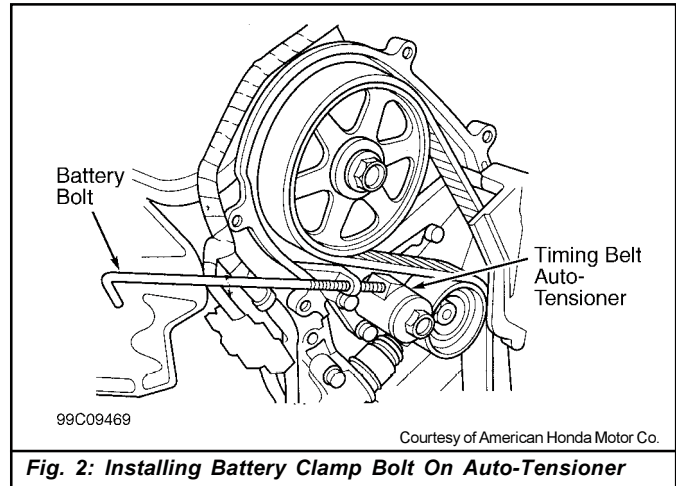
Installing Battery Clamp Bolt On Auto-Tensioner
